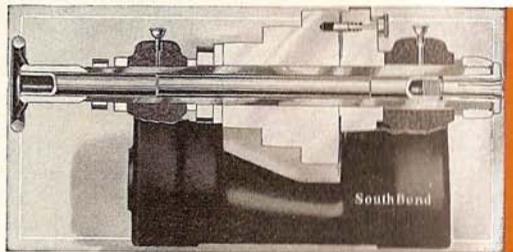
Section of Headstock of Lathe Showing Draw-in Collet Chuck Attachment.
